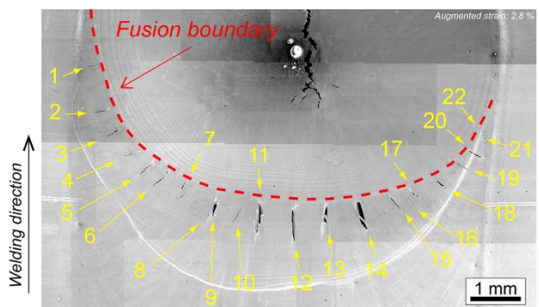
Cross-section of weld bead after Trans-varestraint test under augmented strain 2.8 %.
